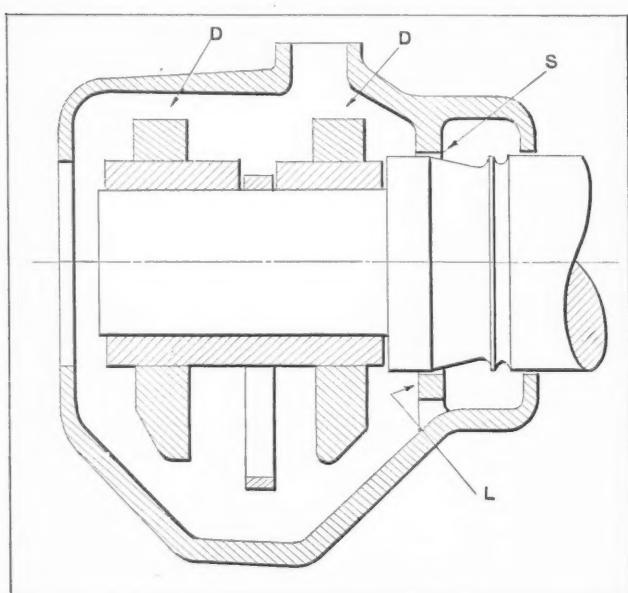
Bearing Design in which the Oil Forms a Frictionless Seal
